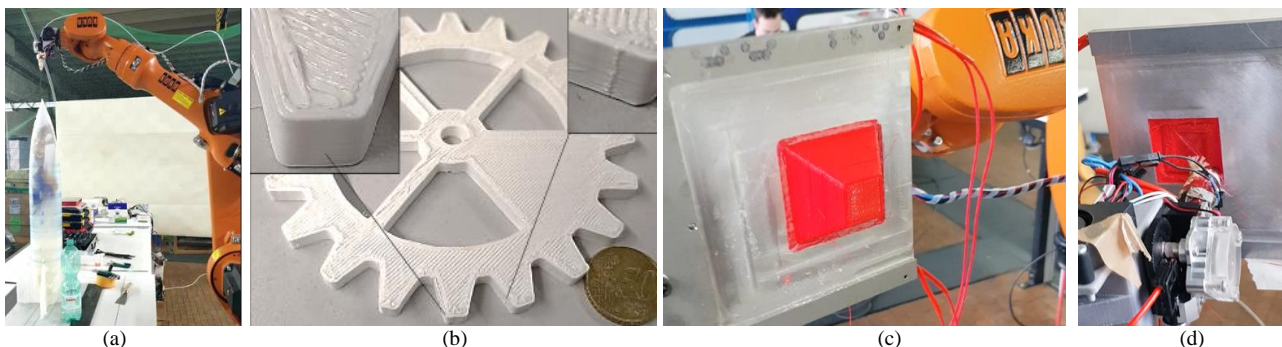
Parts produced using ARMS: a) 1000 mm rocket shell – hollow print using vase-mode, print-speed 60mm/s, nozzle diameter 1mm; b) Gear with diameter 115 mm, build with 0.4 mm nozzle diameter at 30 mm/s; c, d) Building a form-fit joint using strategy 1 at $\gamma = 90^\circ$ (top & bottom view).
